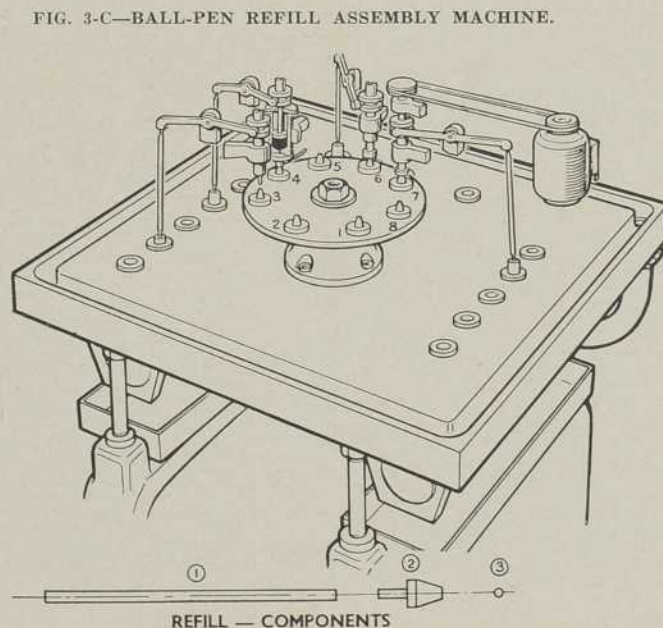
C—BALL-PEN REFILL ASSEMBLY MACHINE.
